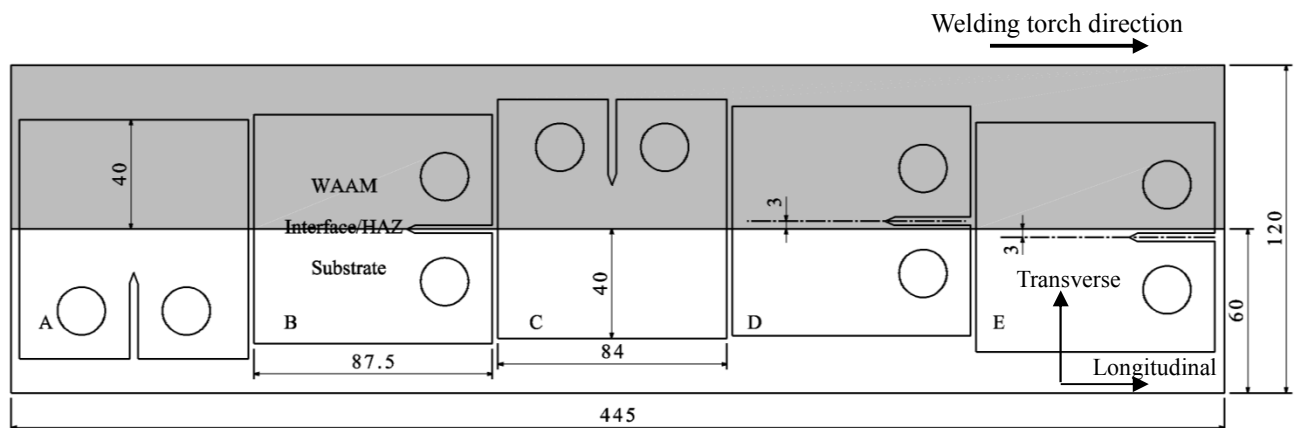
Layout of test specimens on a WAAM-substrate wall showing the WAAM-substrate interface location on each type of C(T) specimen (unit: mm)
